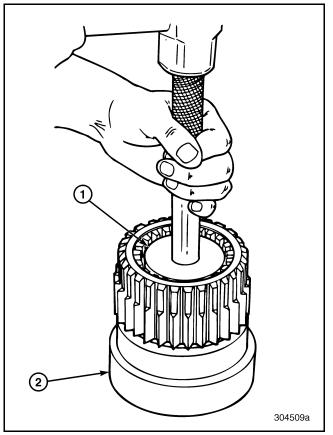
Removing Ball Bearing from Gear (T313L/T318L Shown)
